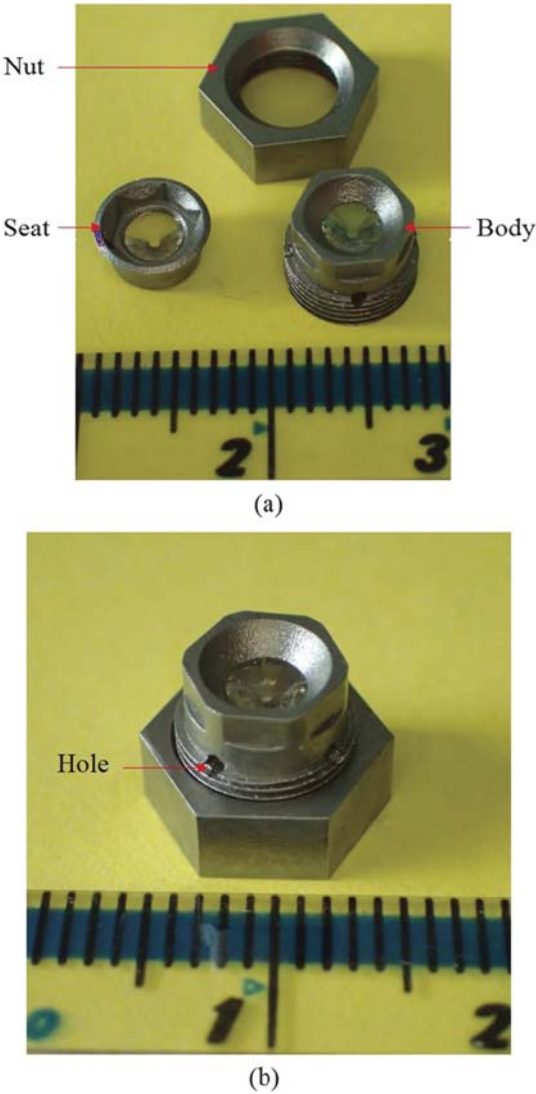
The cell parts (a) which are constructed by 3D micro laser sintering (b). There are 4 holes with the diameter of 1 mm circumferentially equispaced on the body part for checking the alignment of the diamonds and mounting the DAC on the goniometer head of the diffractometer.
